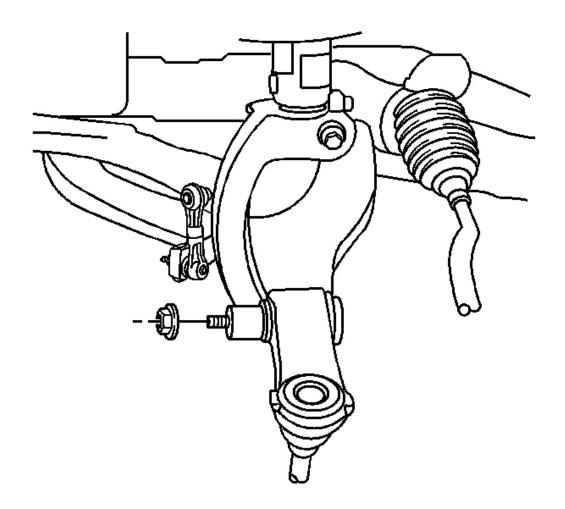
Removing/Installing Shock Module Yoke Lower Mounting Nut Courtesy of GENERAL MOTORS CORP.
